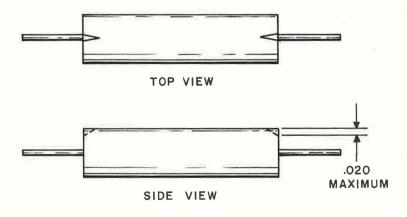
Maximum Depth of Resistor Notches for Coil Winding
